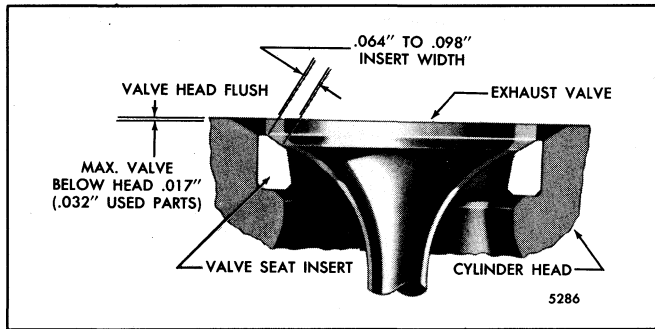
Relationship between Exhaust Valve, Valve Insert and Cylinder Head
